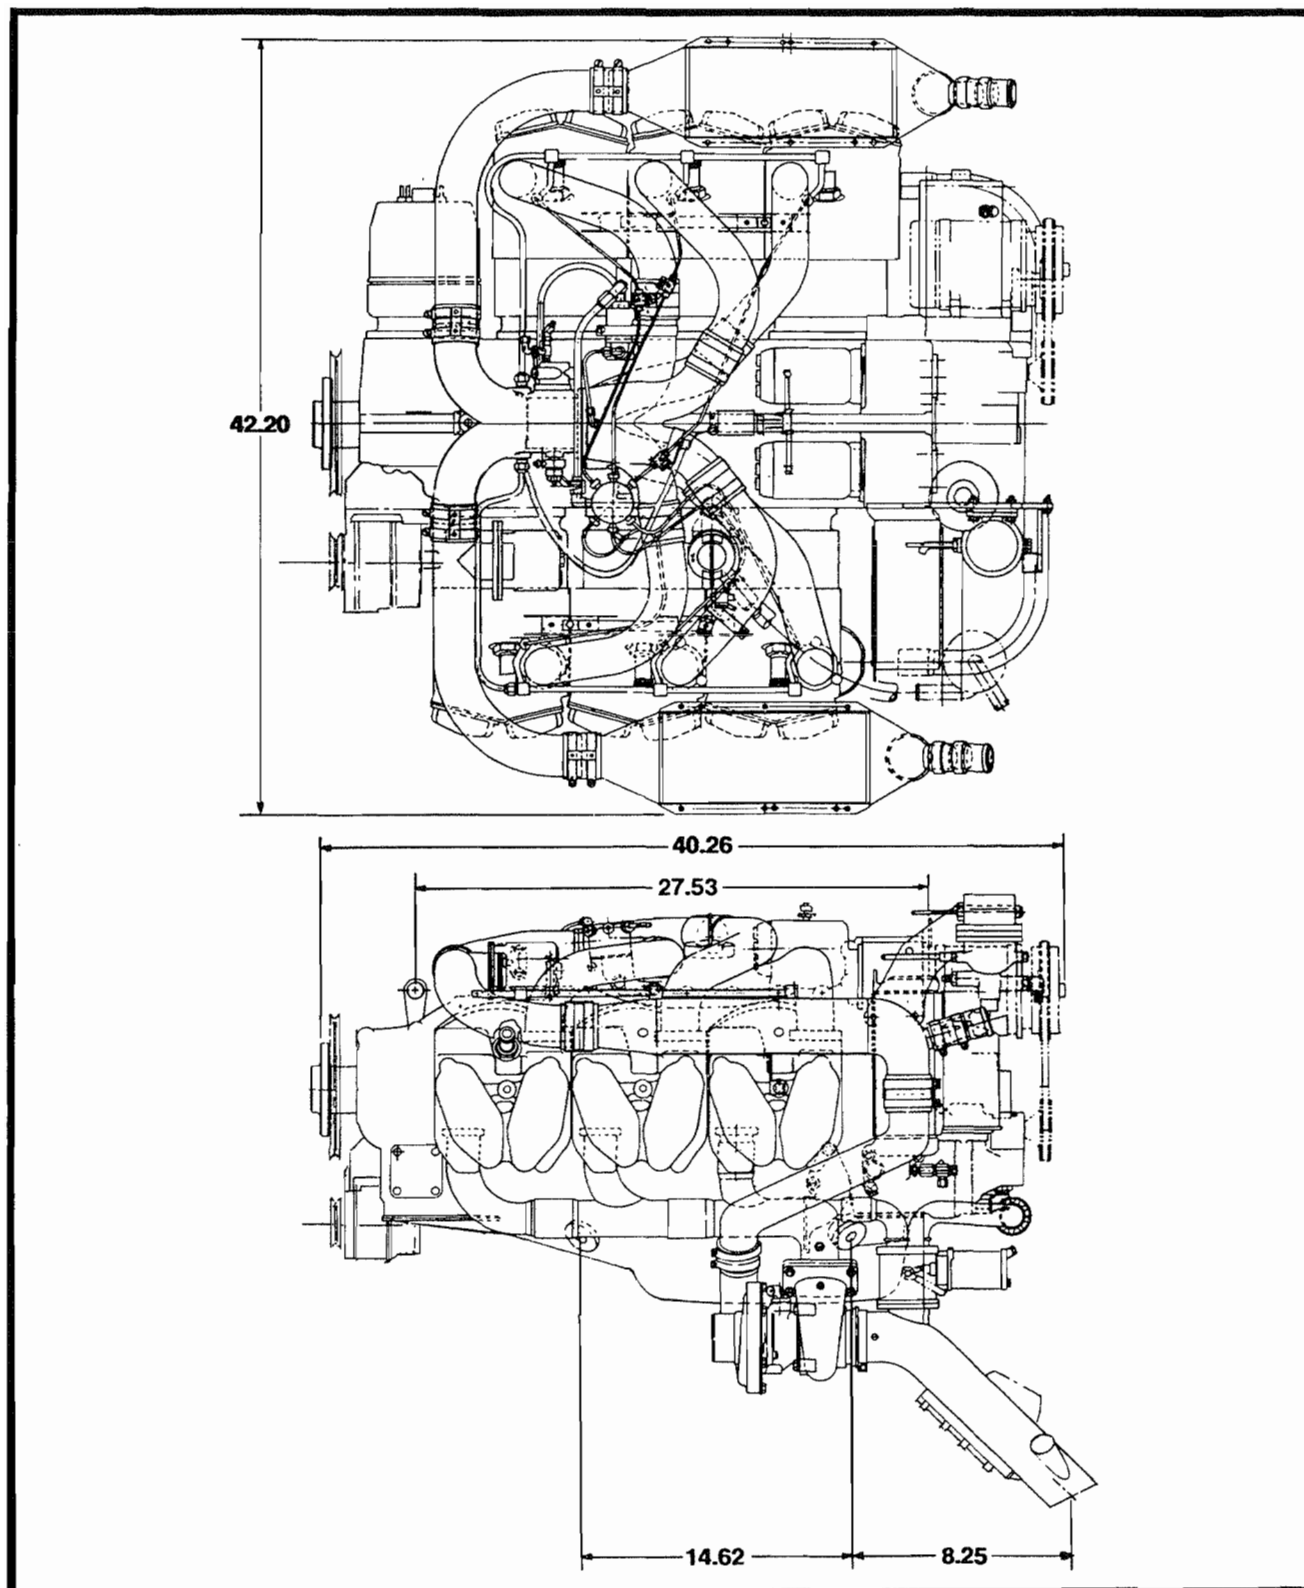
INSTALLATION DRAWING TSIO-520-BE
